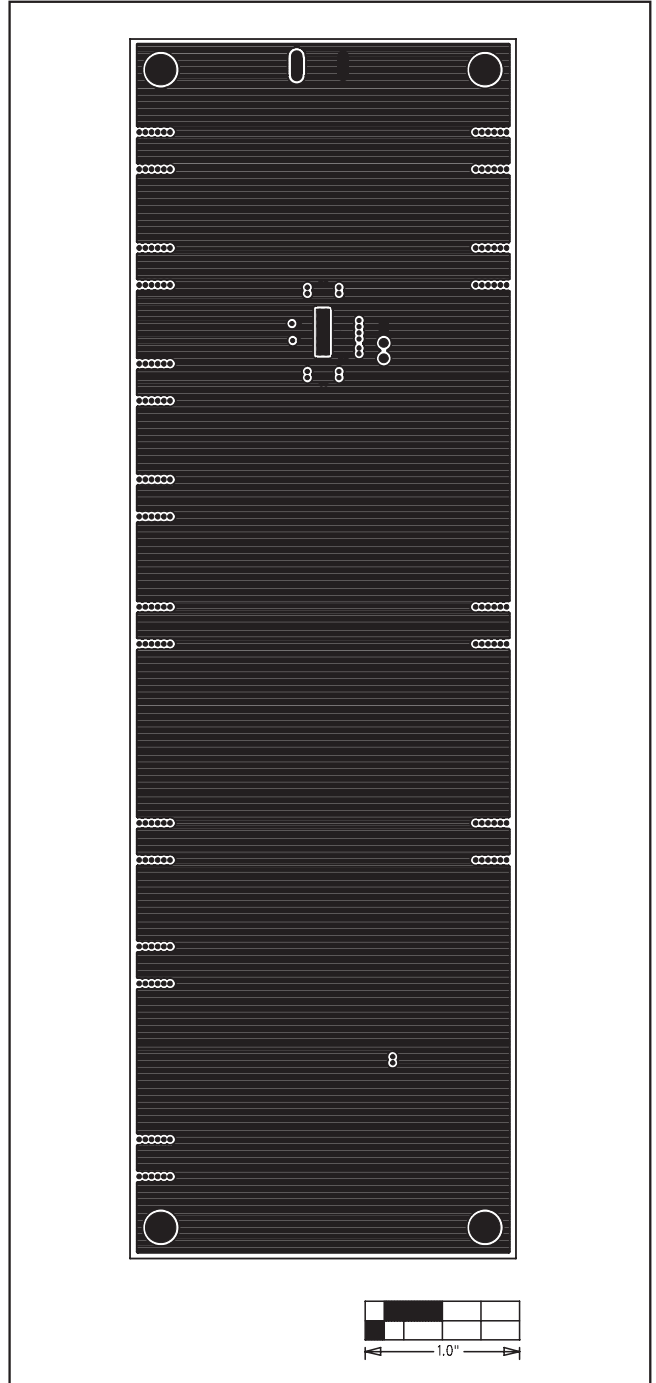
MAX4889B EV Kit PCB Layout—Inner Layer 3
